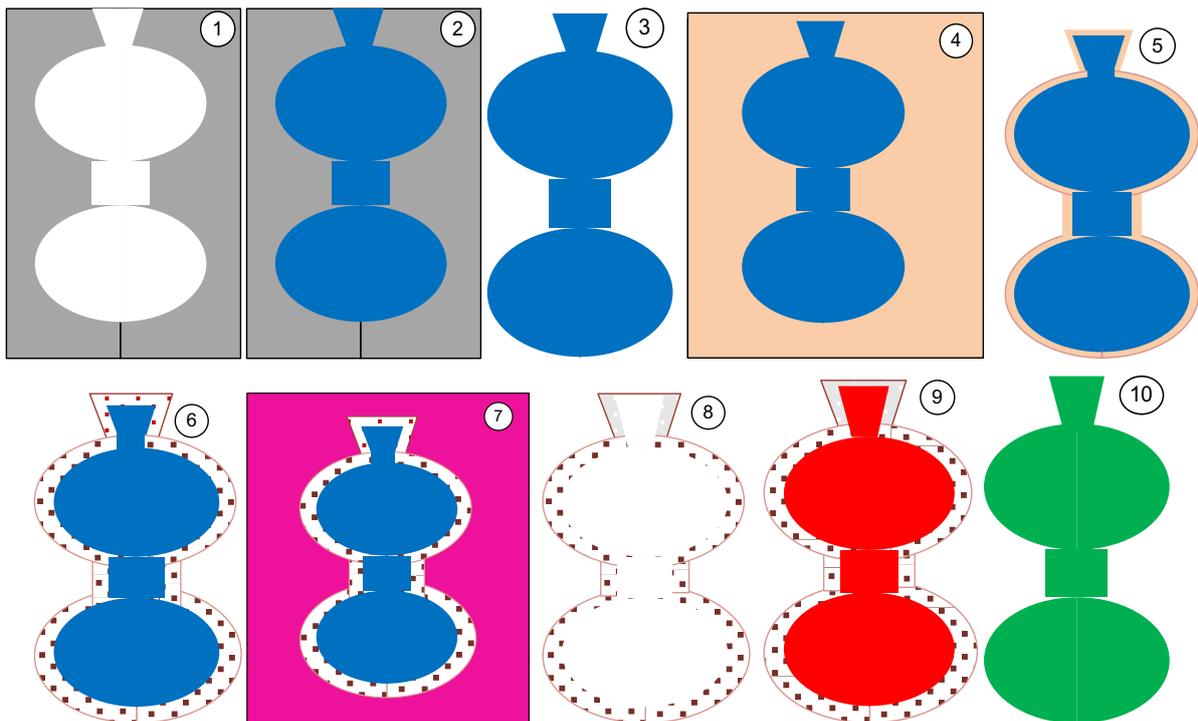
Schematic showing stages of investment casting processes 1) preparation of desired metallic mould, 2) filling the mould with molten wax, 3) taking out the wax pattern, 4) dipping wax pattern in ceramic slurry, 5) wet coating of slurry on the wax pattern, 6) sprinkle and deposit ceramic powder particle over the wet slurry coated wax pattern (steps 4 to 6 may be repeated until ceramic coating of desired thickness obtained), 7) baking of ceramic coated wax pattern, 8) melting, removal of wax leaves behind ceramic shell/mould cavity, 9) pour the molten metal in ceramic shell/mould cavity and 10) break ceramic shell to remove casting after solidification.
